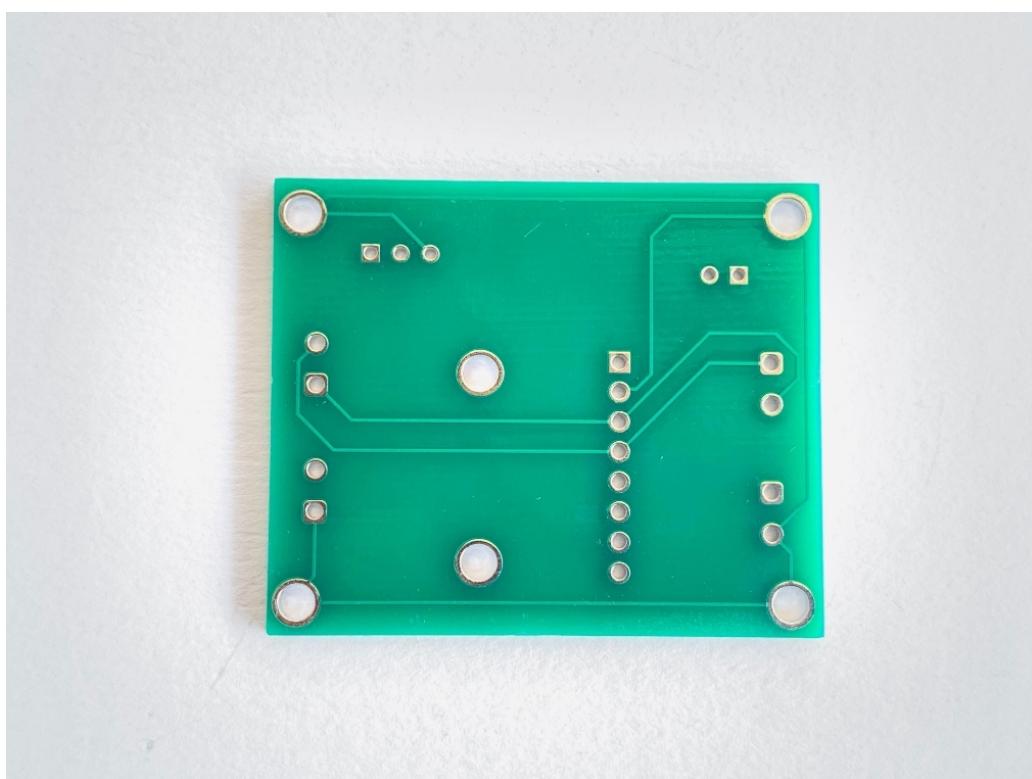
Unsoldered Sensor Module PCB - Bottom
